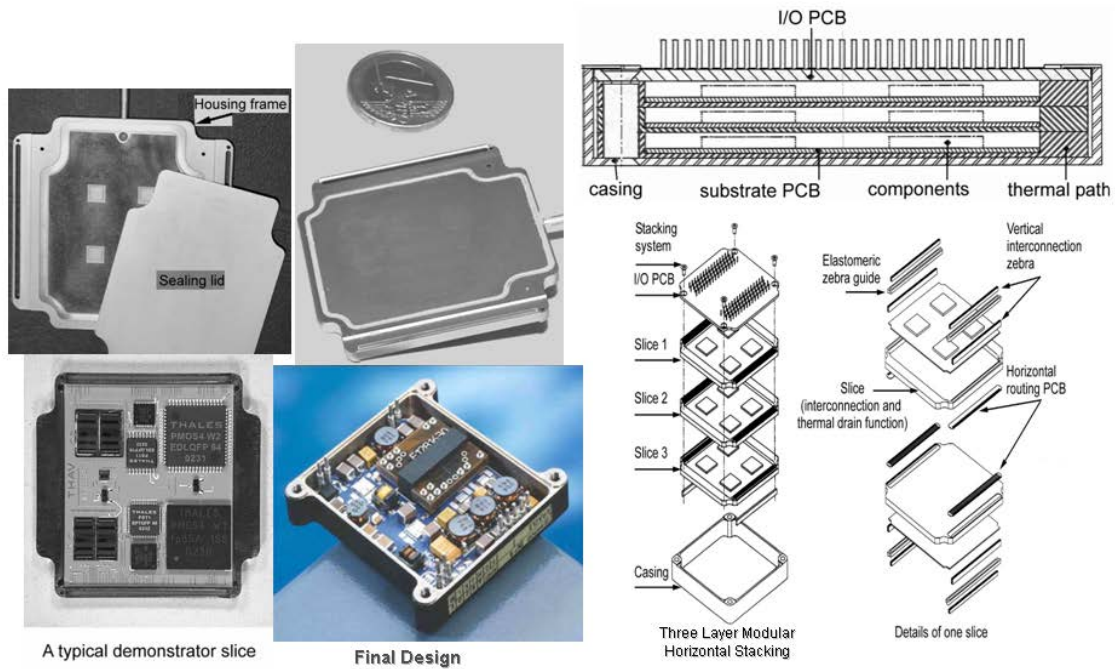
Heat pipe cooled modular 3D package (EU Project MCUBE)
